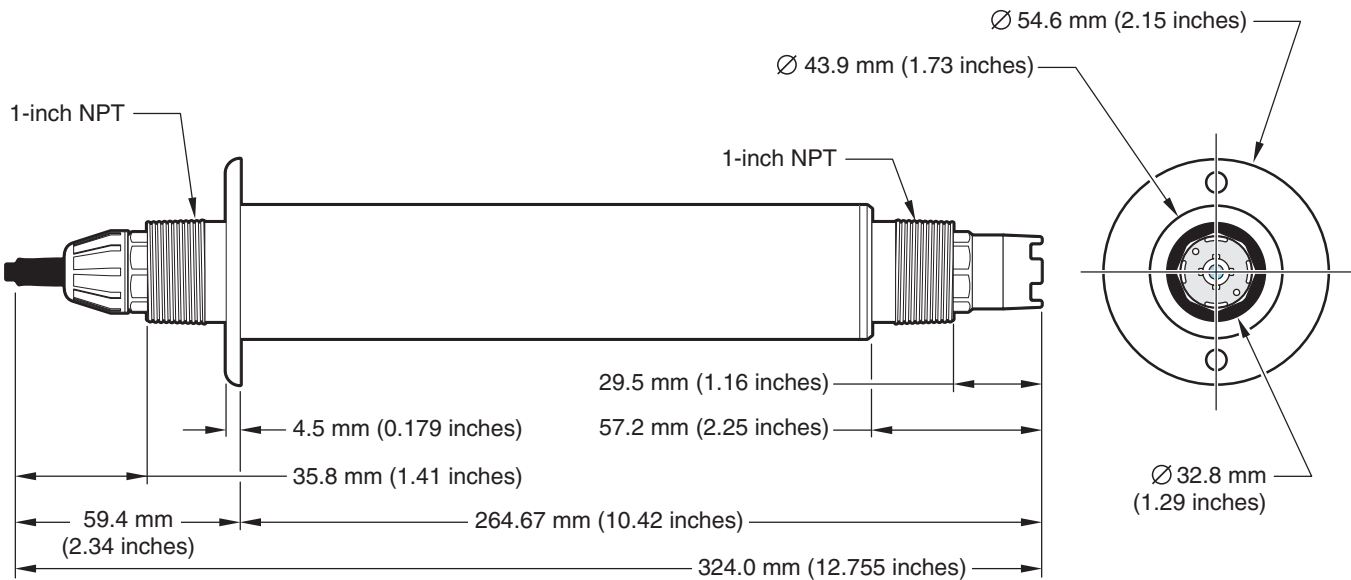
Stainless Steel Style Sensor (DPS1 and DRS5) Dimensions
